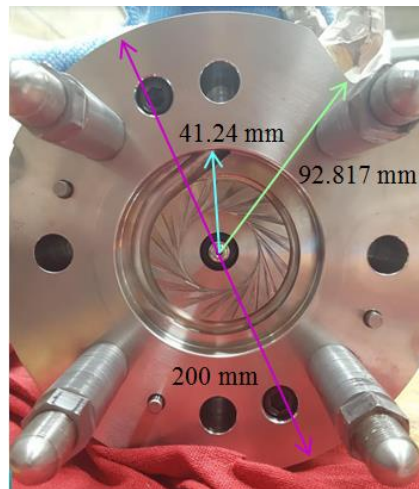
Bolt Pattern Design in a Modular Casing Plate
